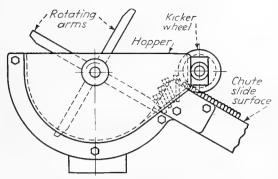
Same type hopper and rotating arms as in Fig. 429, but a different chute, designed to feed bolts. Kicker wheel at the mouth of the chute kicks back into the hopper the bolts that do not enter the chute properly.
